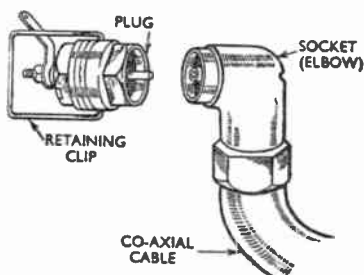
Concentric type of plug and socket which is designed for use in conjunction with co-axial cable handling radio-frequency currents.
